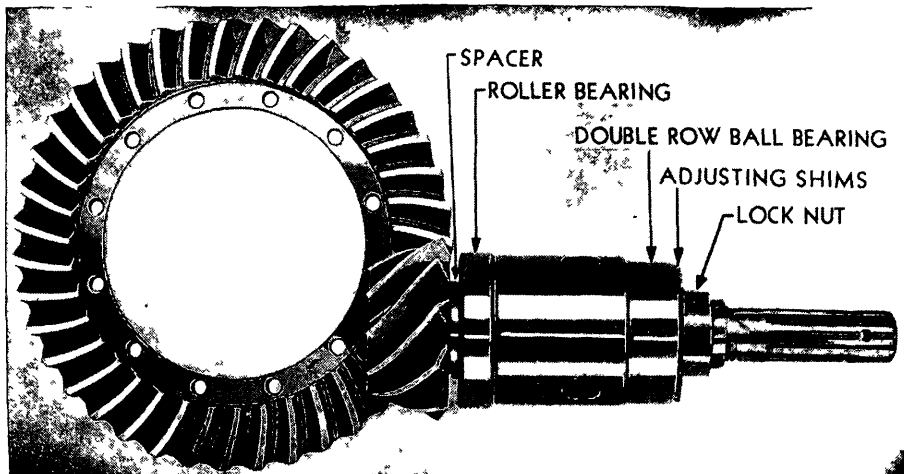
Ring gear and pinion set-up, 1936-52 models. Some models have two roller bearings at rear of pinion shaft
